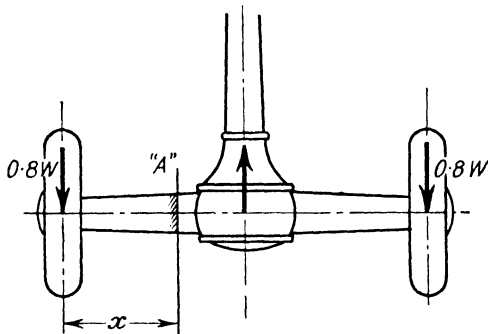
LOADING OF A TORQUE-TUBE-AXLE SYSTEM BY BRAKING FORCES
